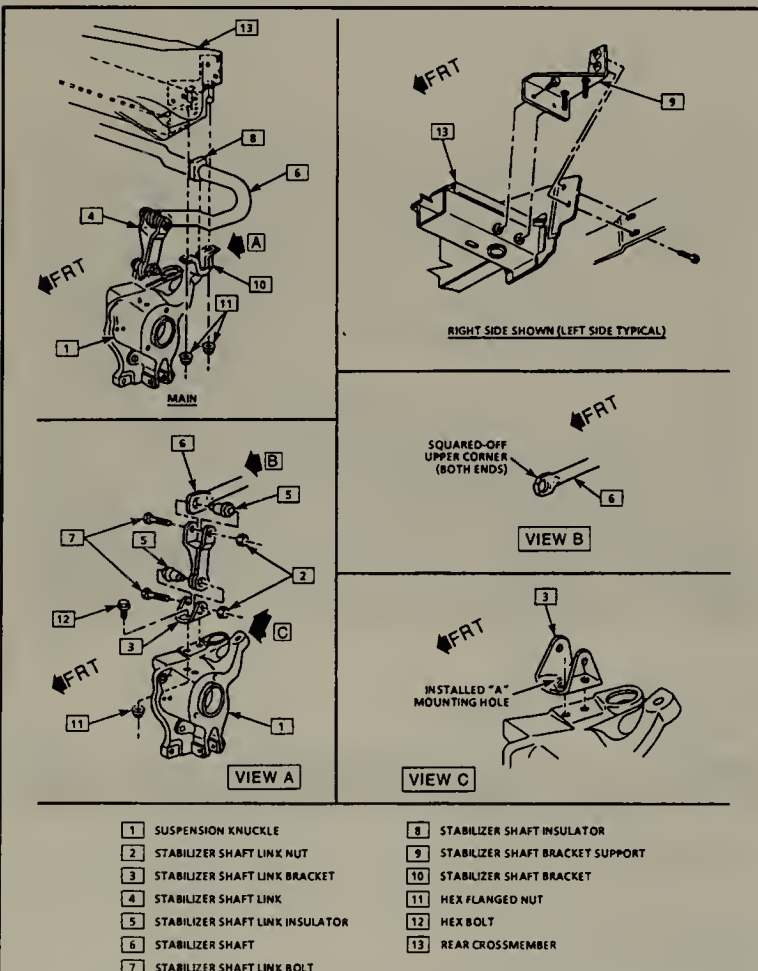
View of the rear stabilizer (sway) bar-to-link attachment (see arrows)
